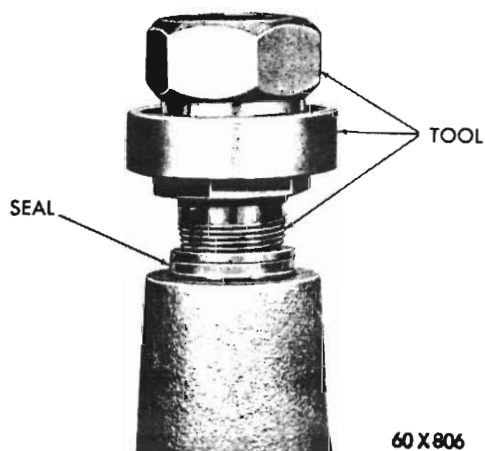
Removing sector shaft oil seal (Tool E19C20A)
